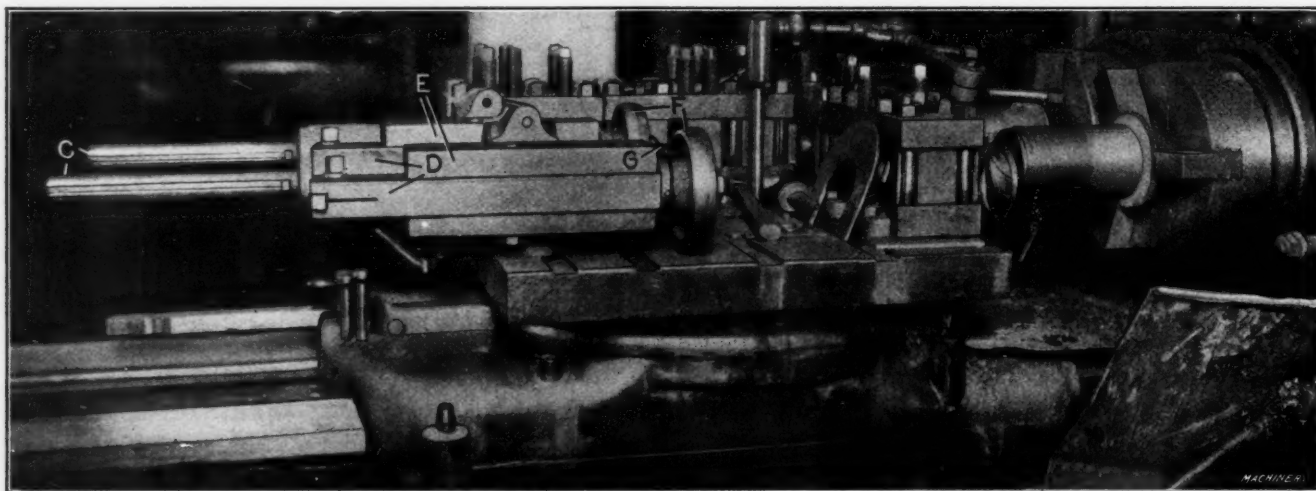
Close View of Machine in Fig. 5, showing Method of driving the Cam Rolls for securing the Eccentricity on the External Diameter of the Rings
